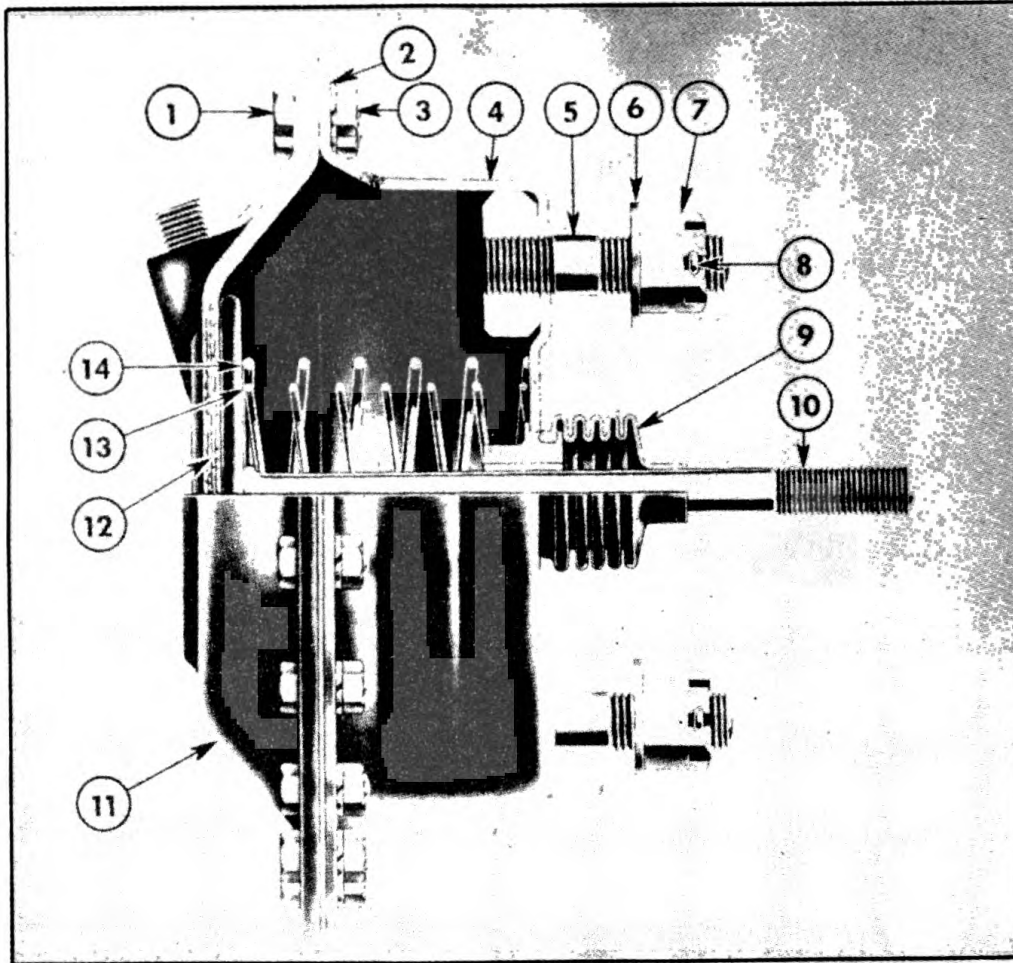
BRAKE CHAMBER—CONVERTER GEAR
